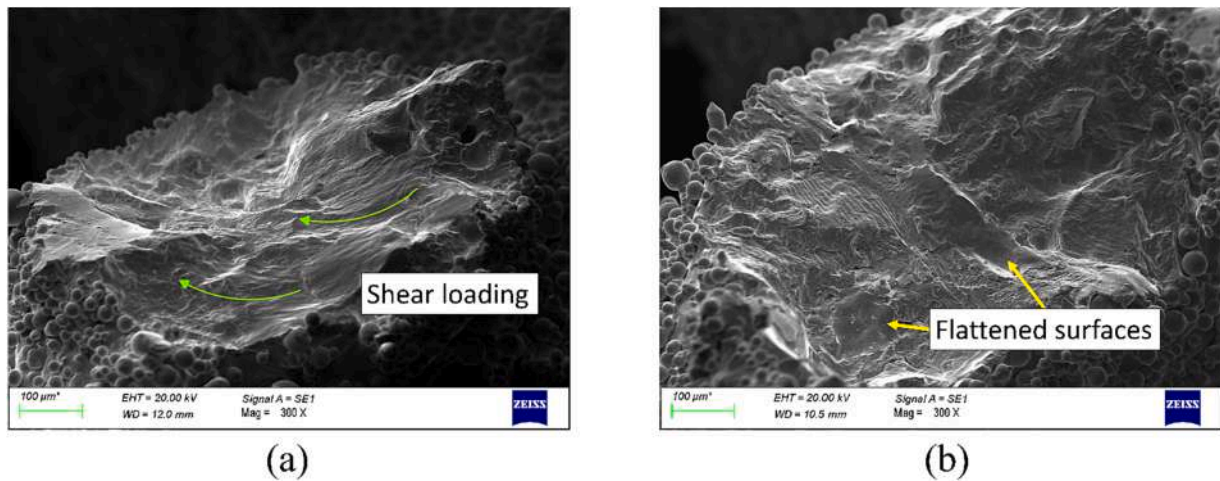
Fracture surfaces of the gyroid specimen tested at 1.2 % strain amplitude: (a) frictional grooves due to shear loading acting on the surfaces and (b) flattened surfaces due to compression loading on split surfaces.
